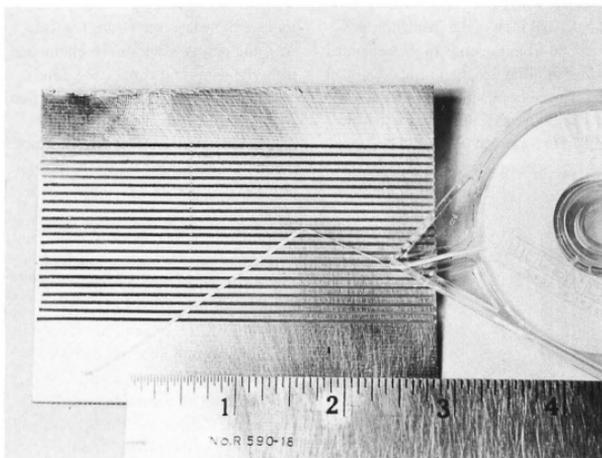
Unfinished, Etched Printed Circuit Board for Adapter.
